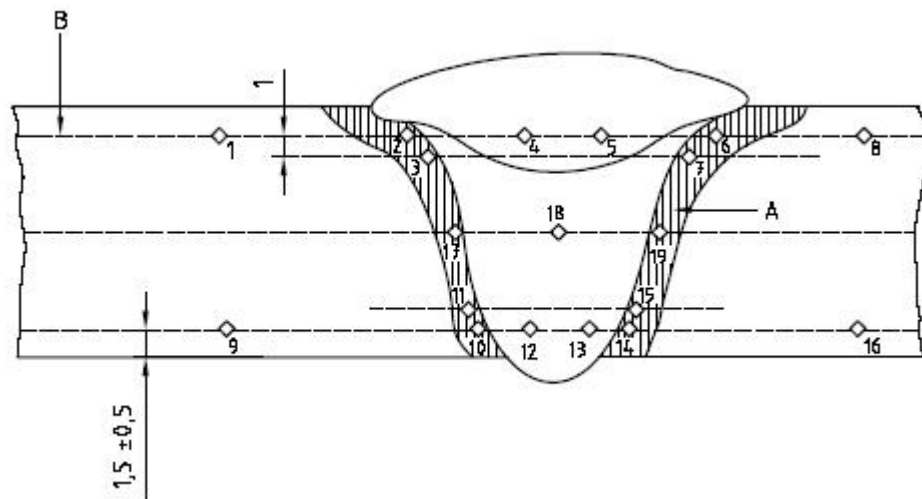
Vickers Hardness for Butt Weld
